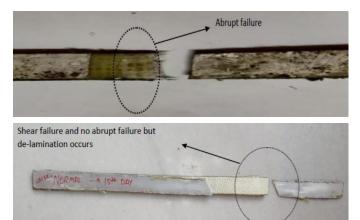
Tensile specimen after fracture on the 1st day and 15th day
